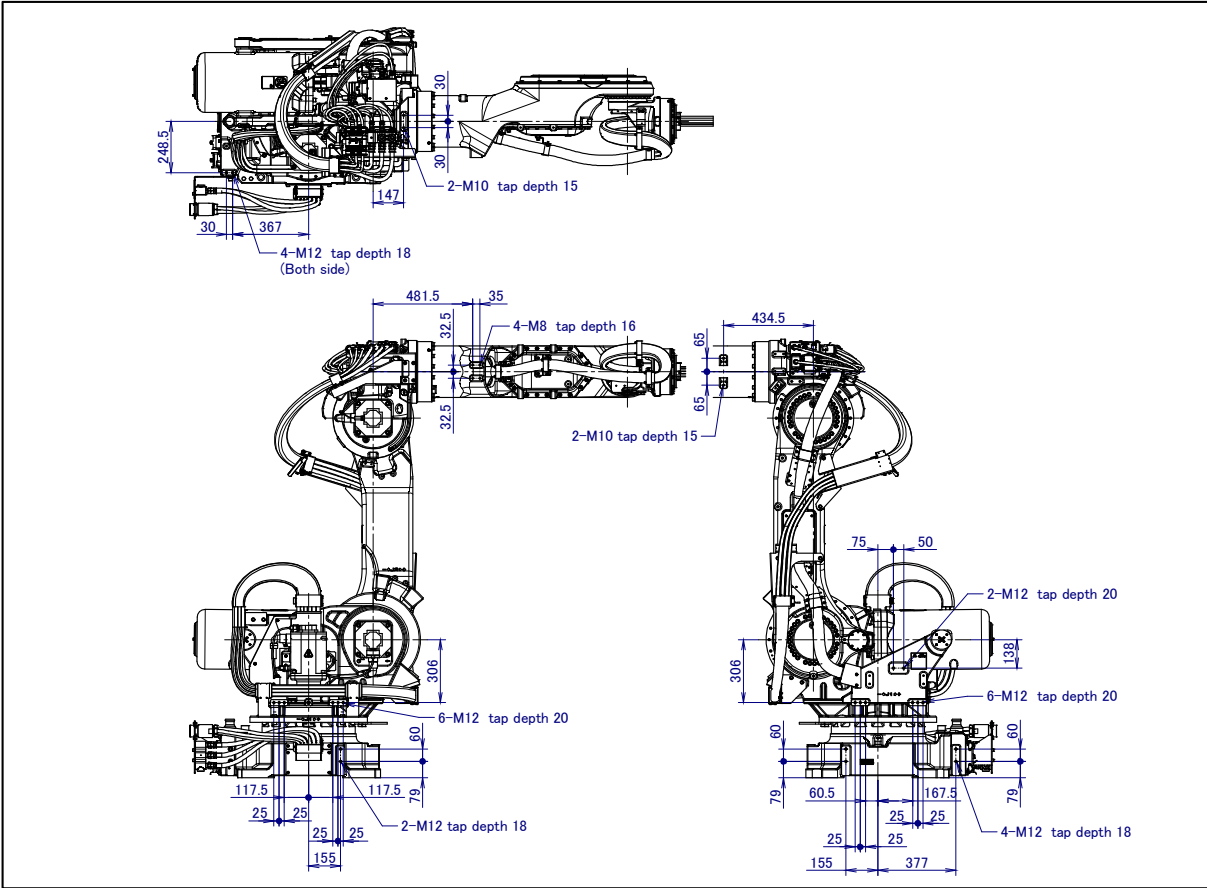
(k) Equipment mounting faces(R-2000iB/210FS/220US)
